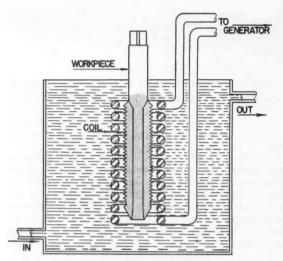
Diagram Illustrating Arrangement of Equipment for Immersion Heating
